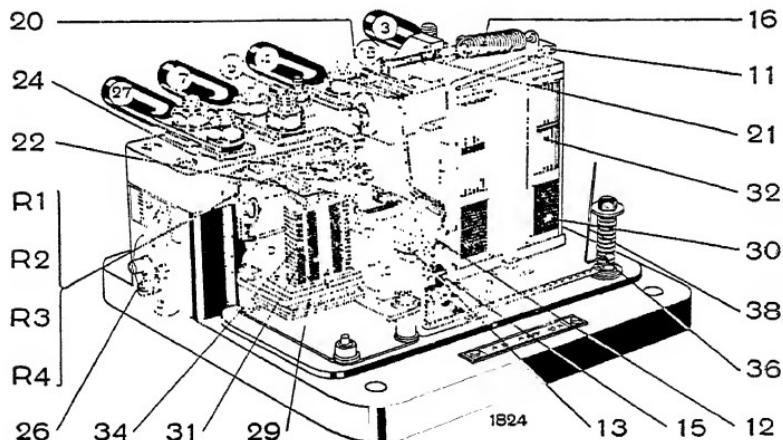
SCINTILLA C.V.C. REGULATOR AND CUT-OUT
